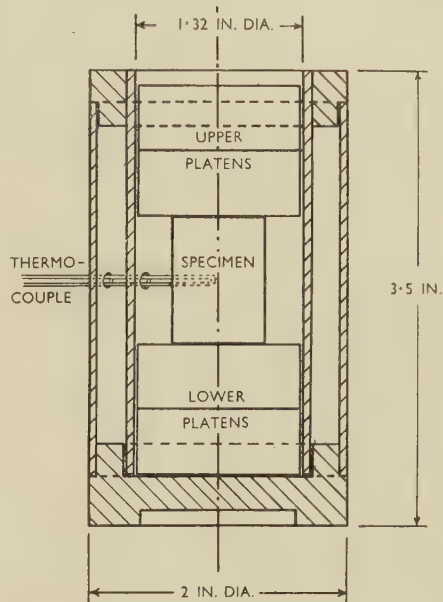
Final Pattern of the Guard-Ring Box, with the Specimen in Position. The thermocouple is removed before compression.
